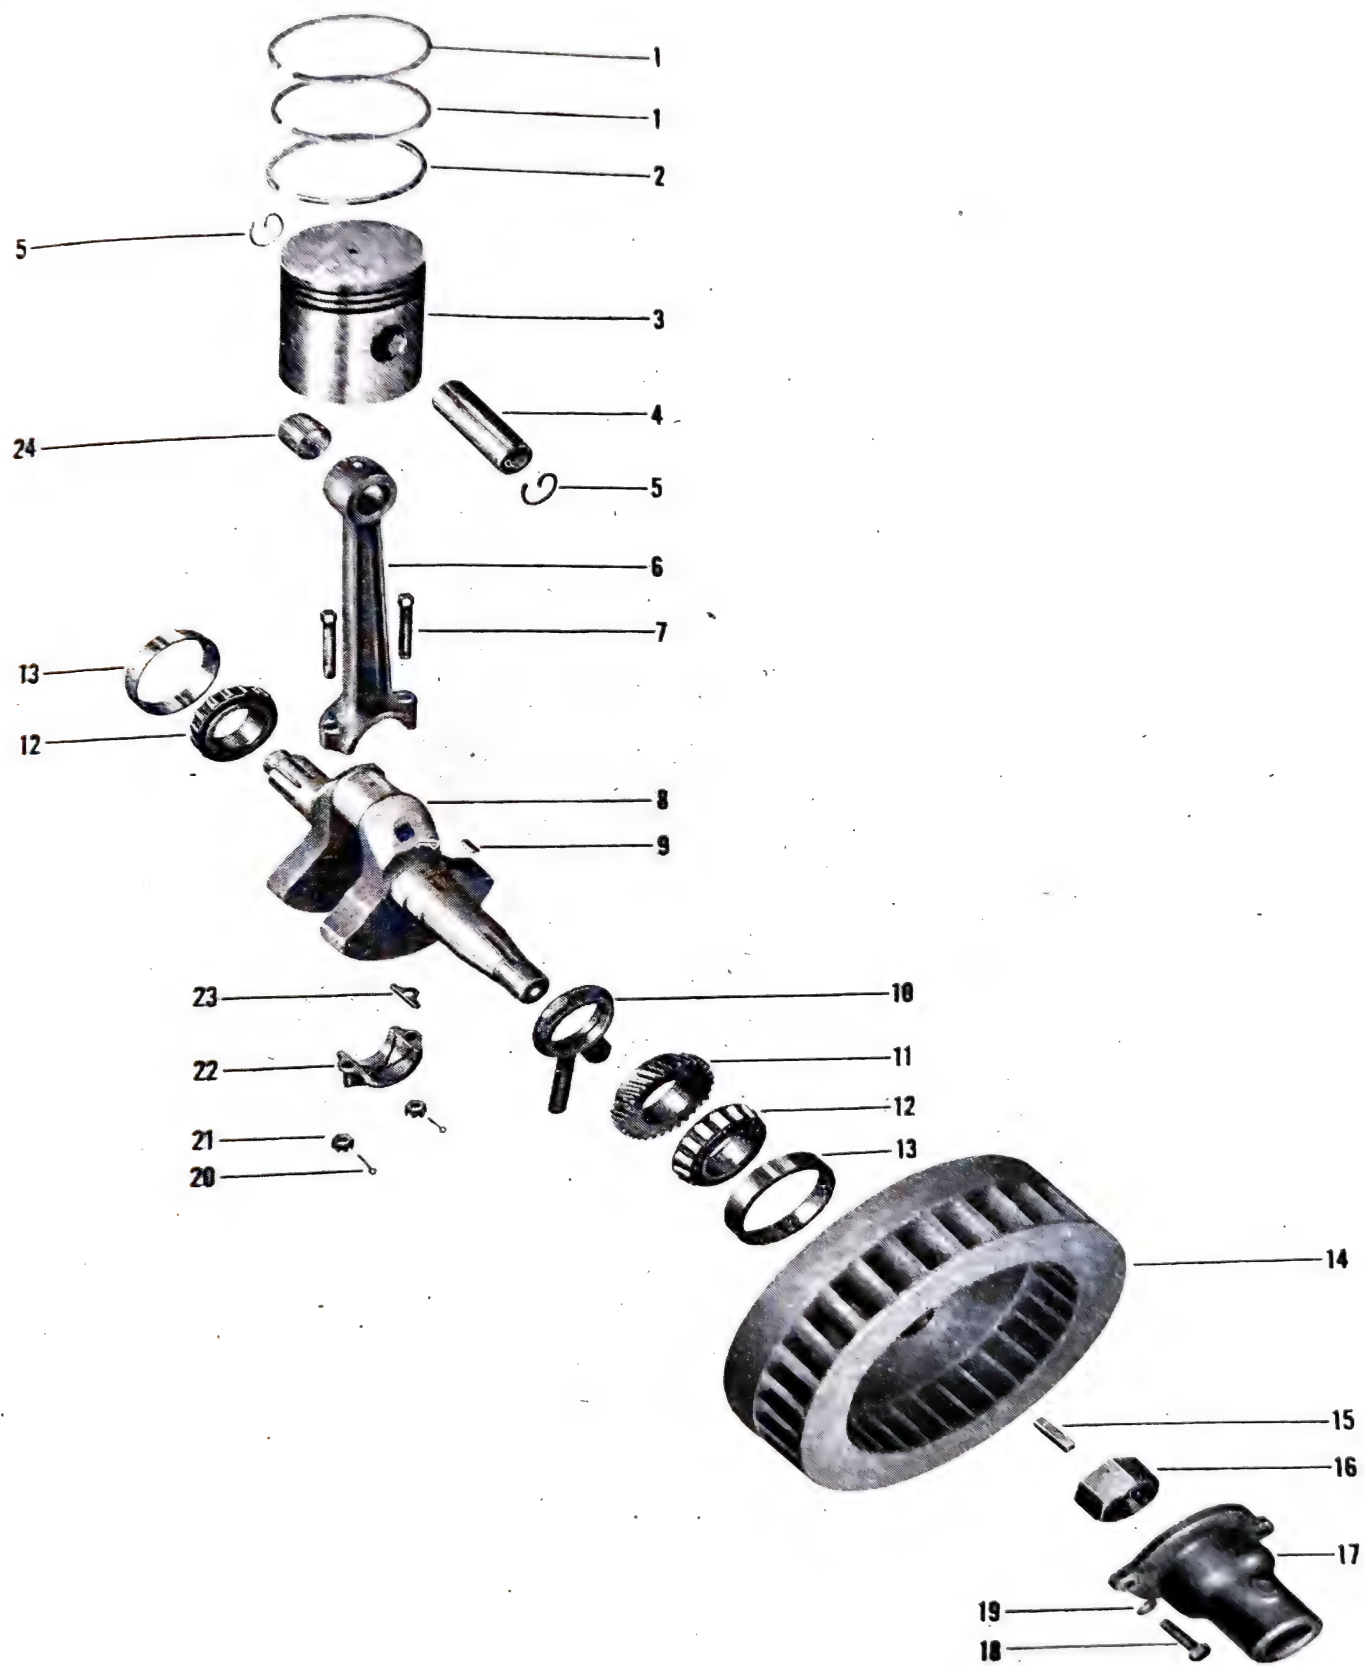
Engine crankshaft, flywheel, piston and connecting rod.
